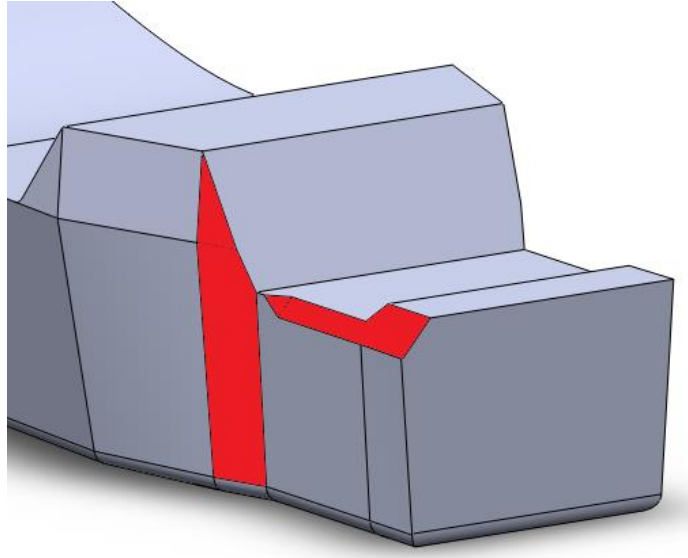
Rear step-down rocker chamfer terminated with drafted cut to remove non-planar geometry.
